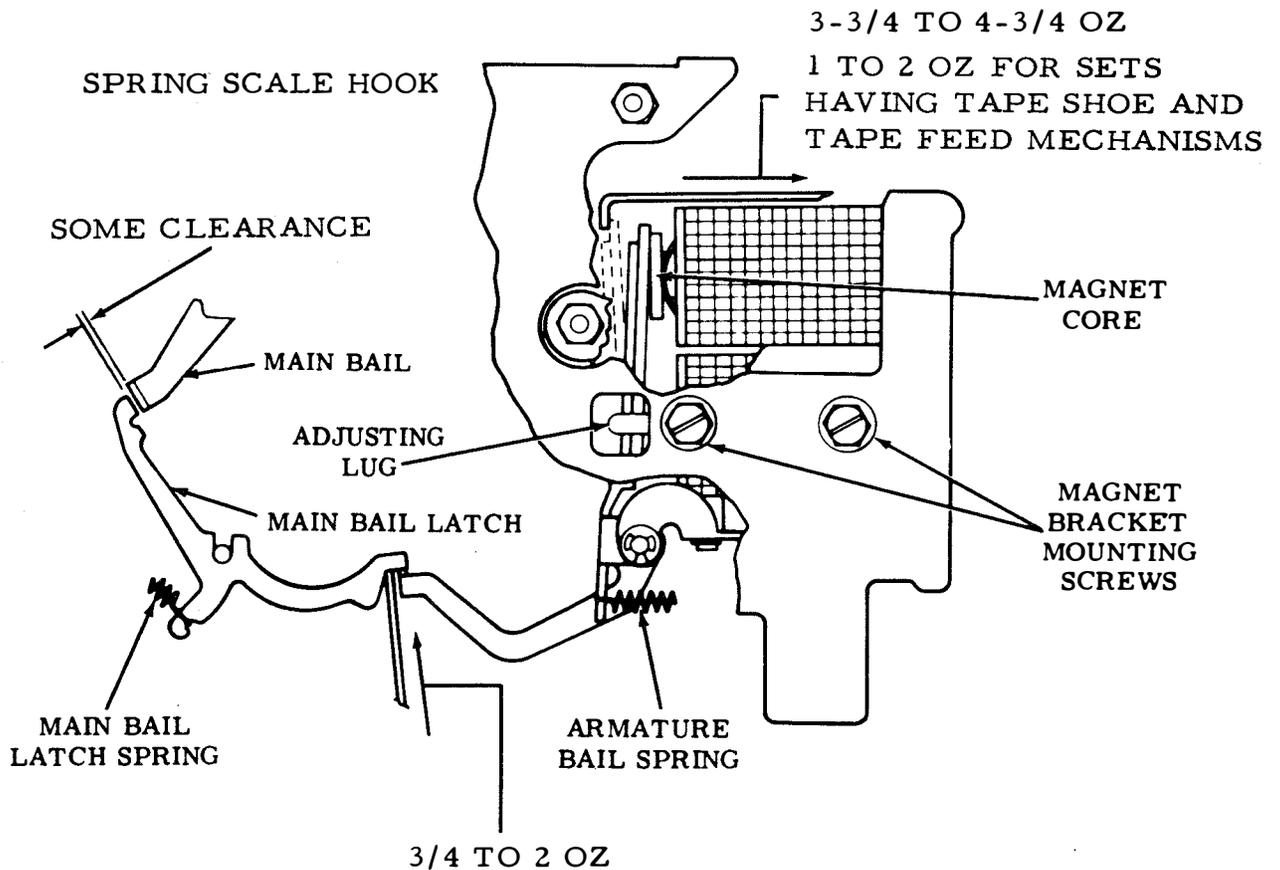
Clutch Magnet Assembly (Preliminary) (Latchlever Clearance)
